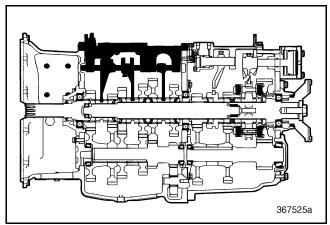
Main Case Shift Cover Component Locator (T313L/T318L Shown)
